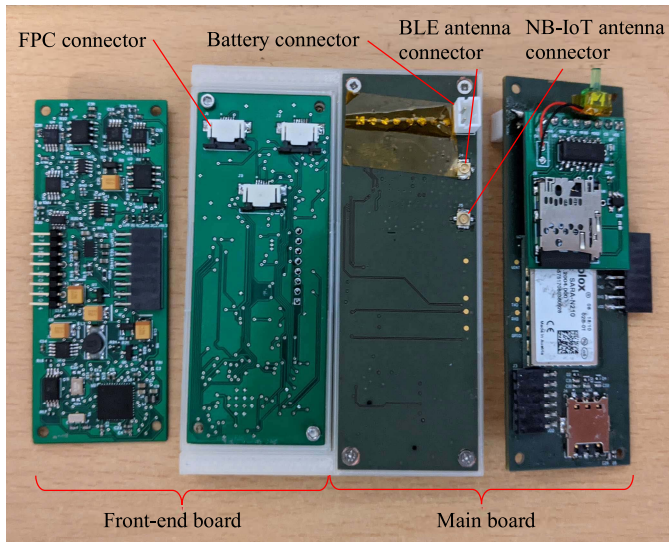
Frontend and main circuit boards. From left to right: Back view of the frontend board, front view of the frontend board (in compartment), front view of main board (in compartment), and back view of main board.
